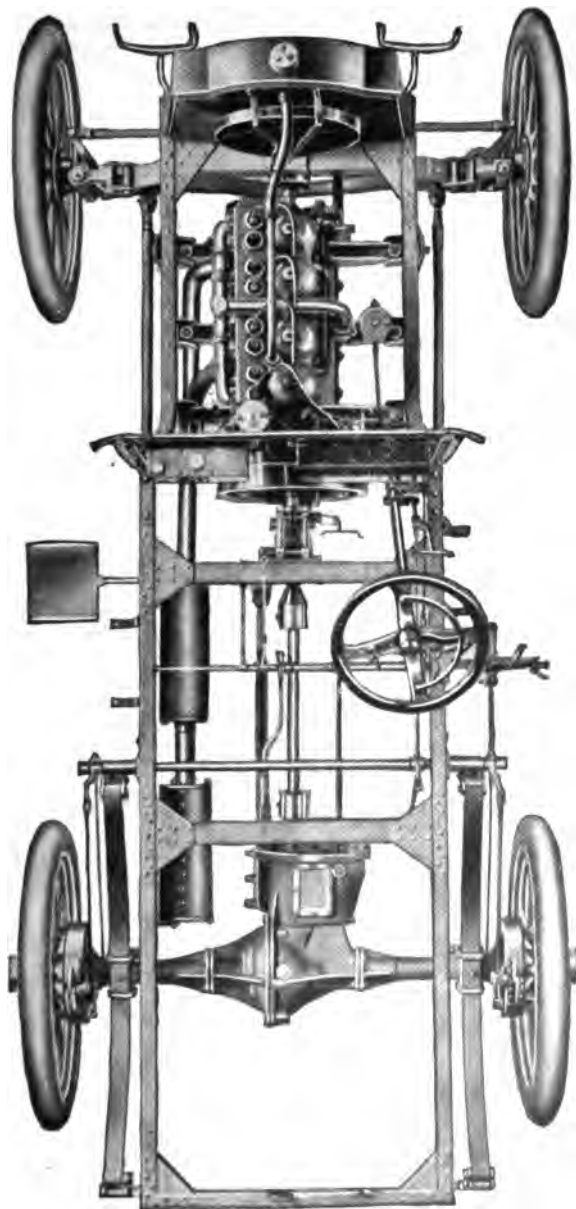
Plan View of Packard Voiture Legere Chassis, showing working parts and control apparatus.
